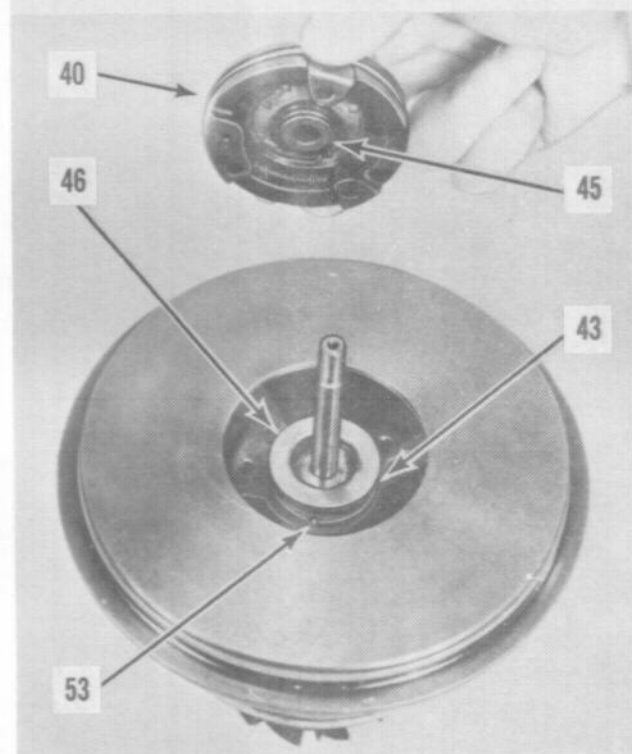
Turbocharger assembly, disassembly and reassembly (sheet 3 of 5).
